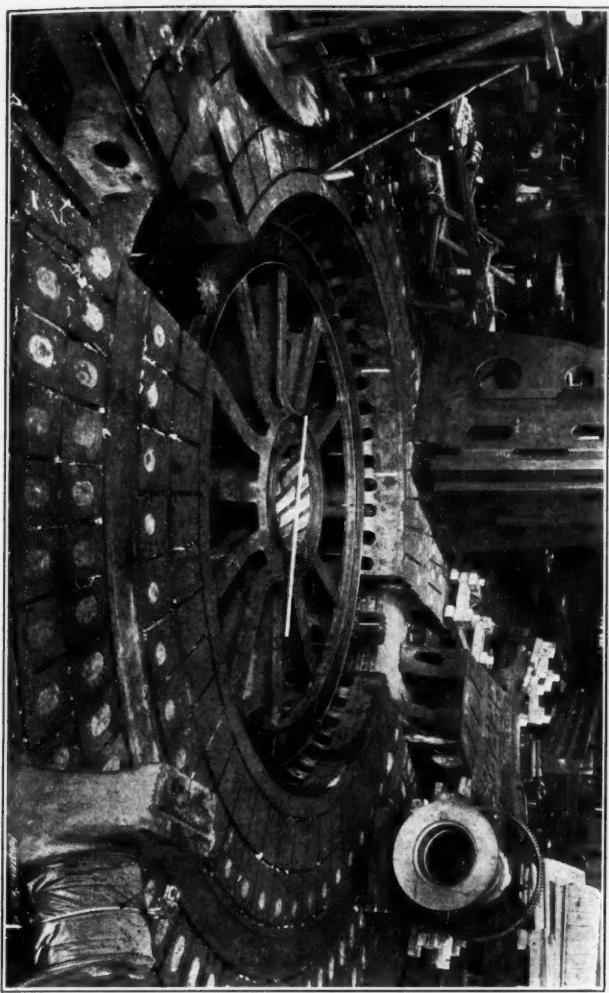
Showing Bed, Bearings for Table, and Driving Pinions.
